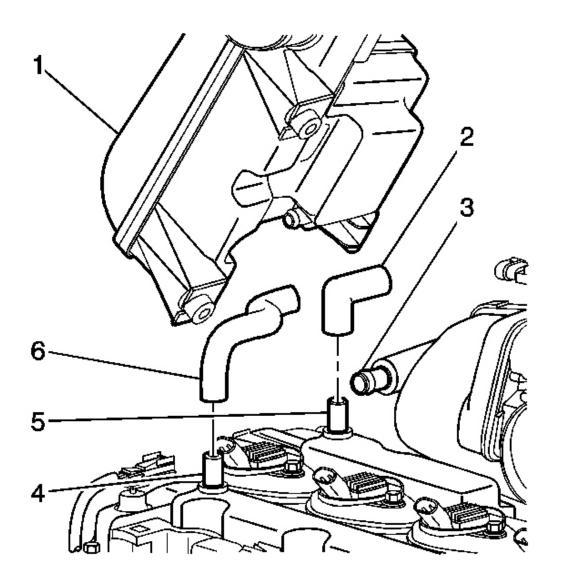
View Of Crankcase Ventilation System Courtesy of GENERAL MOTORS CORP.
